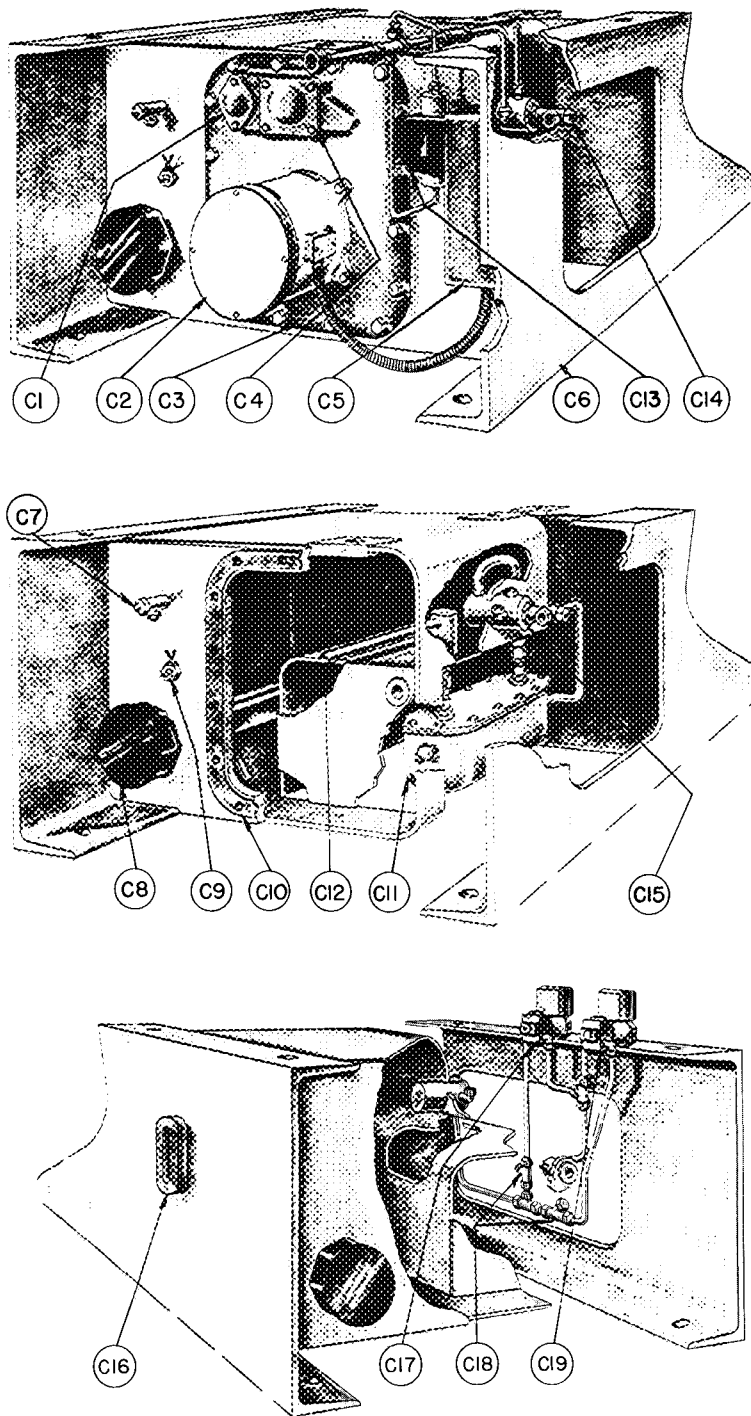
OIL RESERVOIR ASSEMBLY
